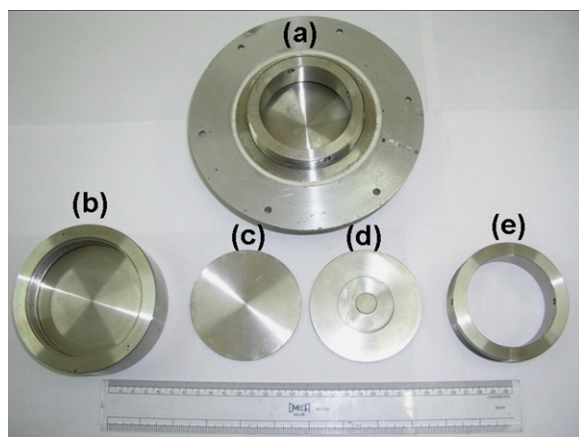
A typical photograph of the recovery fixture and its various components: (a) recovery fixture assembly fixed in holder ring of aluminium, (b) the recovery capsule, (c) cover plate, (d) the actual sample holder plate with an alumina disk sample fitted in the guard ring and (e) the locking nut.
